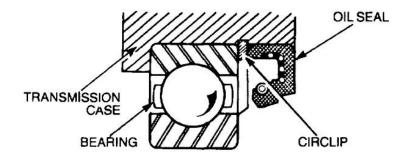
Installation of the Mainshaft Rear Bearing and Oil Seal
